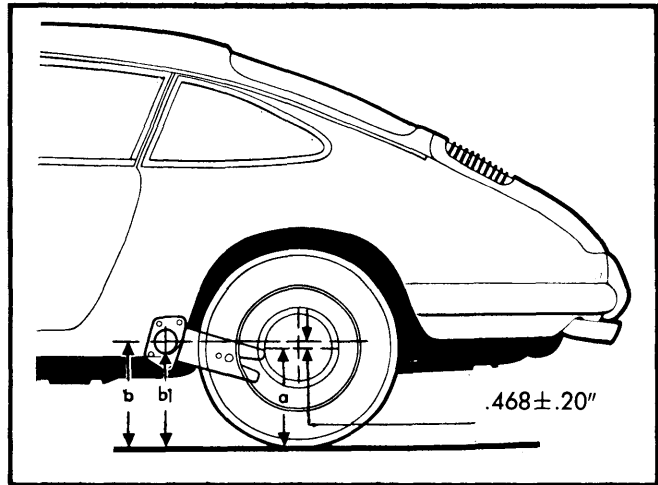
Rear Suspension Riding Height Measuring Points & Dimensions
